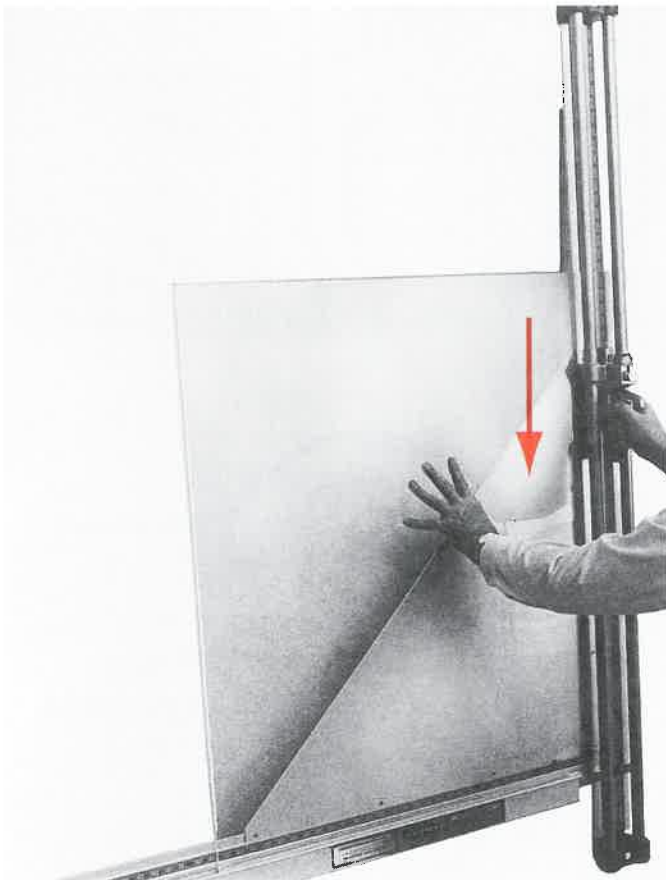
A glass cutting machine assures a straight cut. (Brodhead-Garrett)
